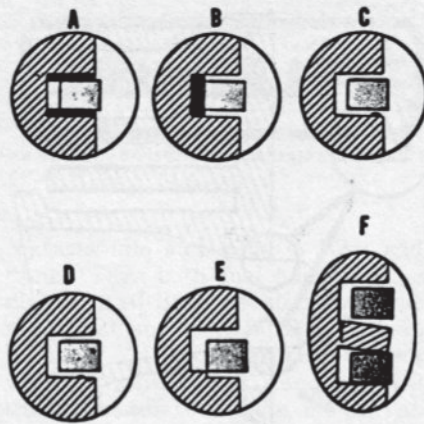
Examine piston for damage before removing old rings. Shown are some common faults.
